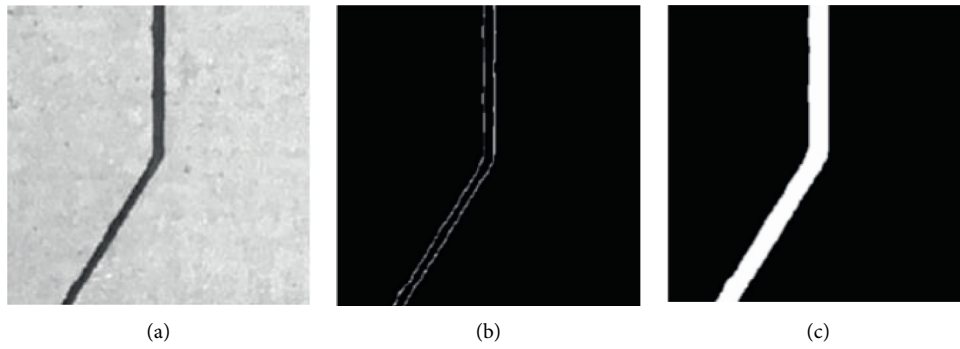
Broken line weld greater than 90° . (a) Original image of weld. (b) Image of weld edge. (c) Image of weld trajectory.
